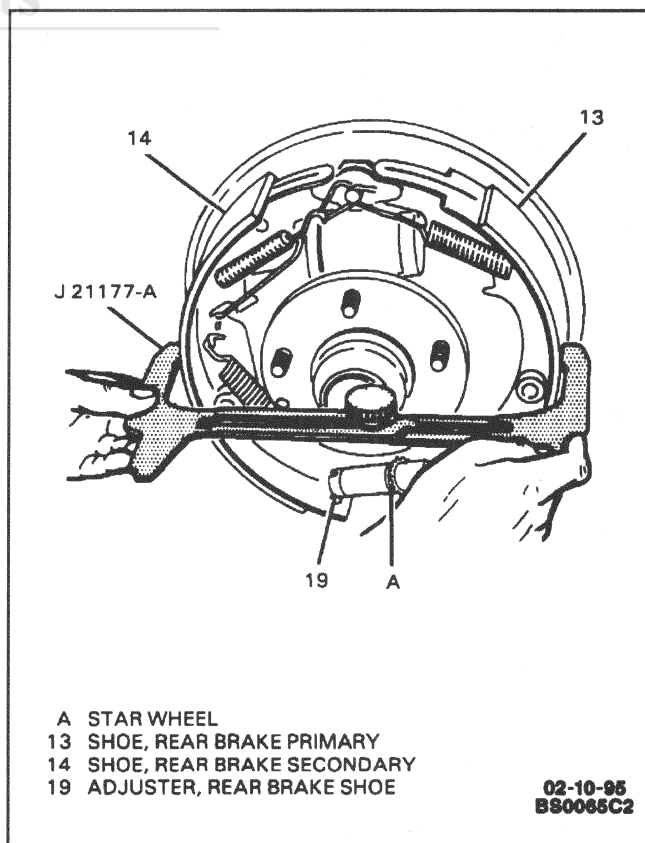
Setting Rear Brake Primary and Secondary Shoes to Tool
